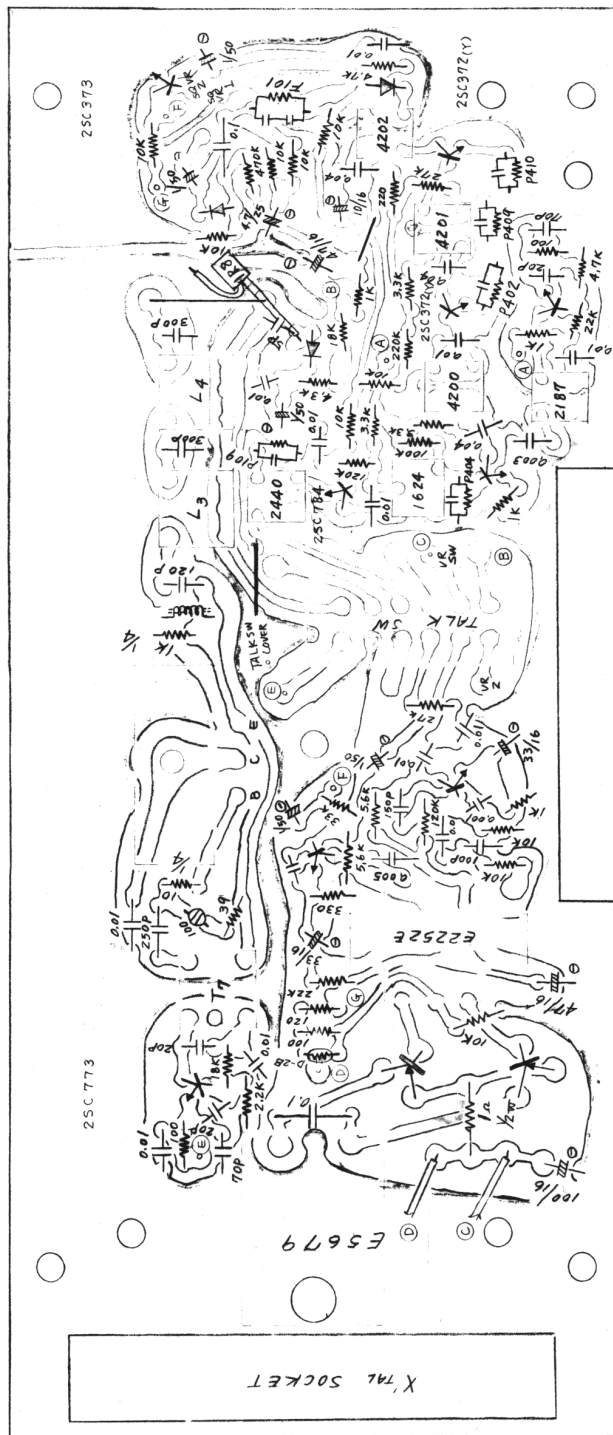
PRINTED CIRCUIT BOARD TOP VIEW
